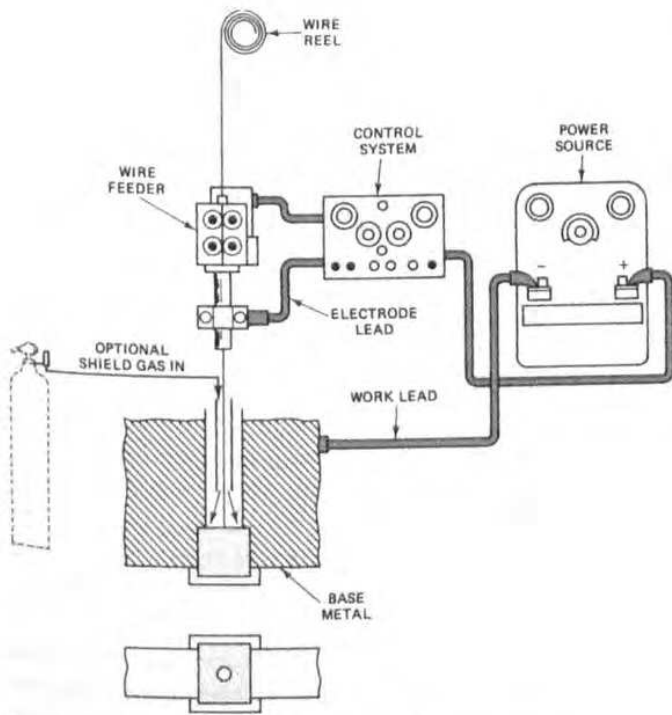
Circuit diagram for the electrogas welding process.
